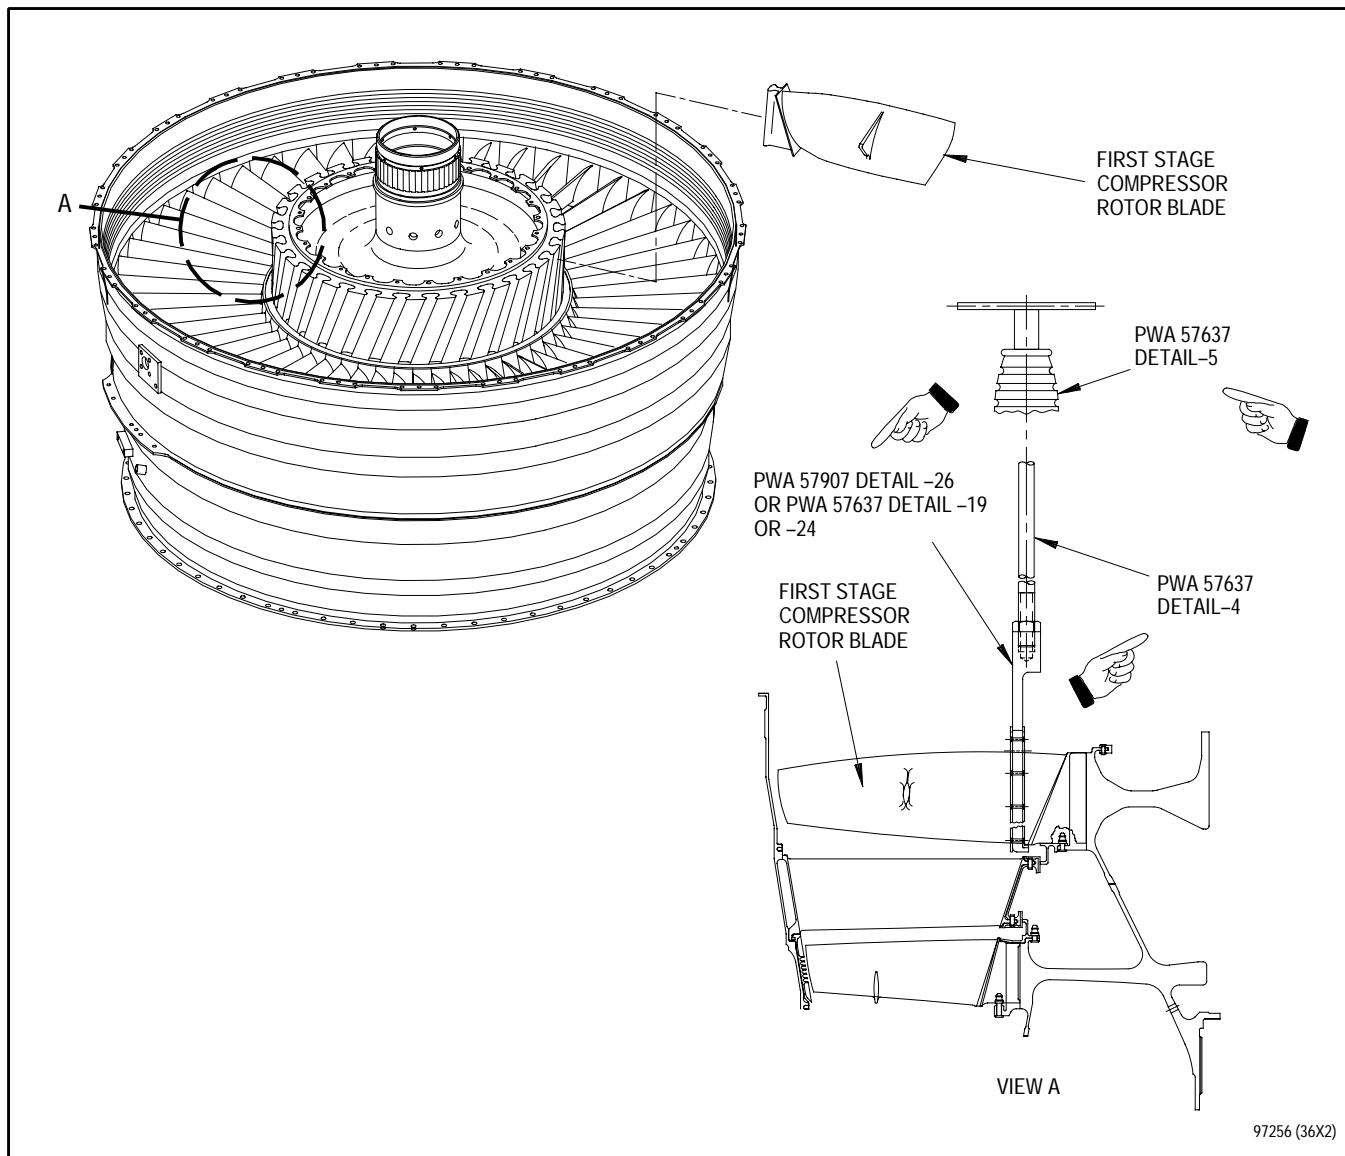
A. First Stage Compressor Rotor Blades - Removal Using PWA 57907 or PWA 57637 Puller Set
